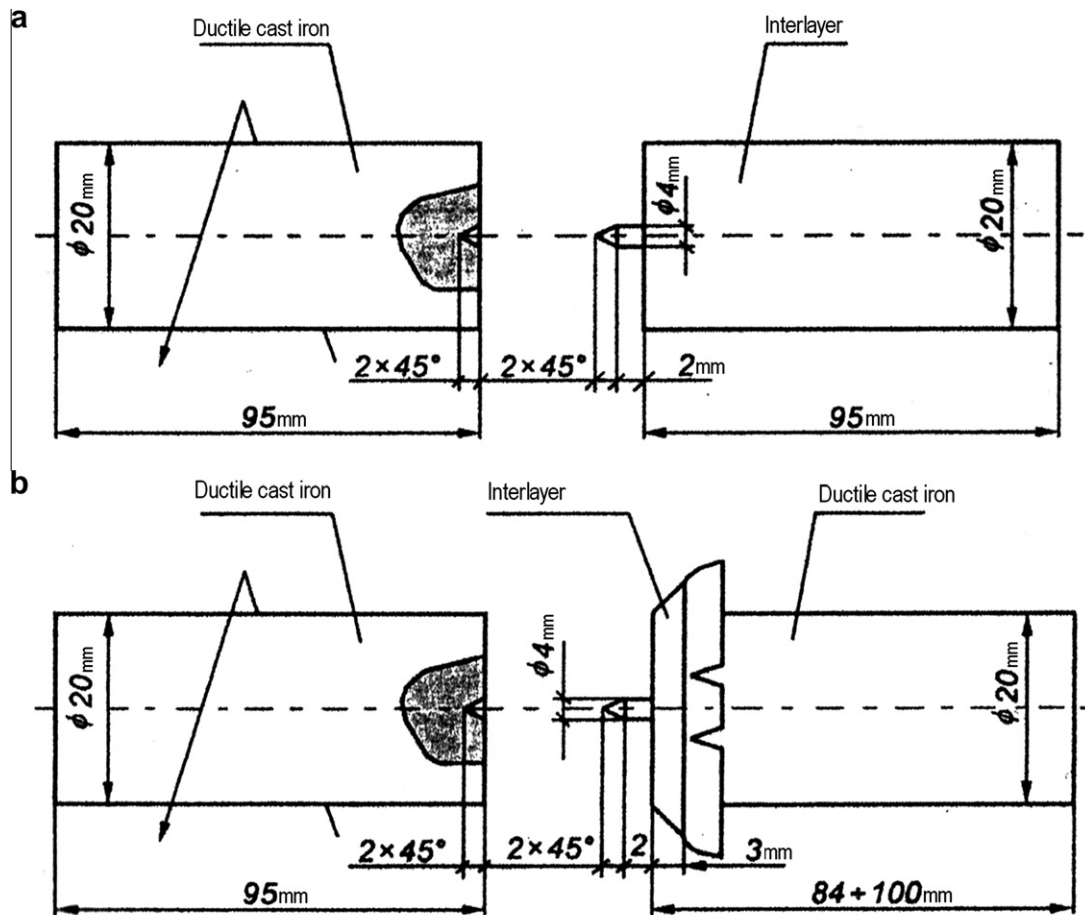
Shape and size of specimens (unit-mm) before friction welding: (a)-friction welding of ductile cast iron to interlayer, (b)-friction welding of ductile cast iron to ductile cast iron by interlayer.
